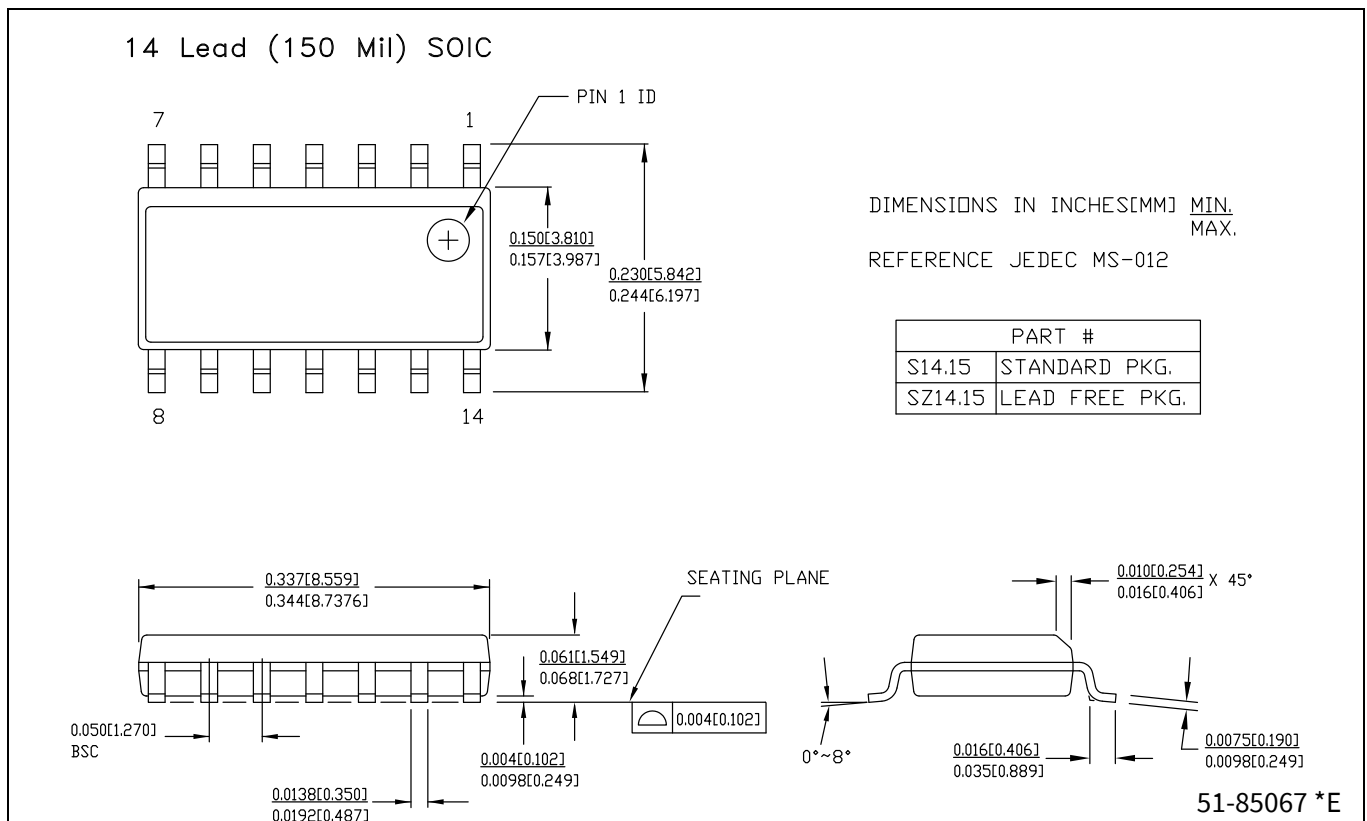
14-pin SOIC package mechanical drawing (PG_DSO-14-800)
